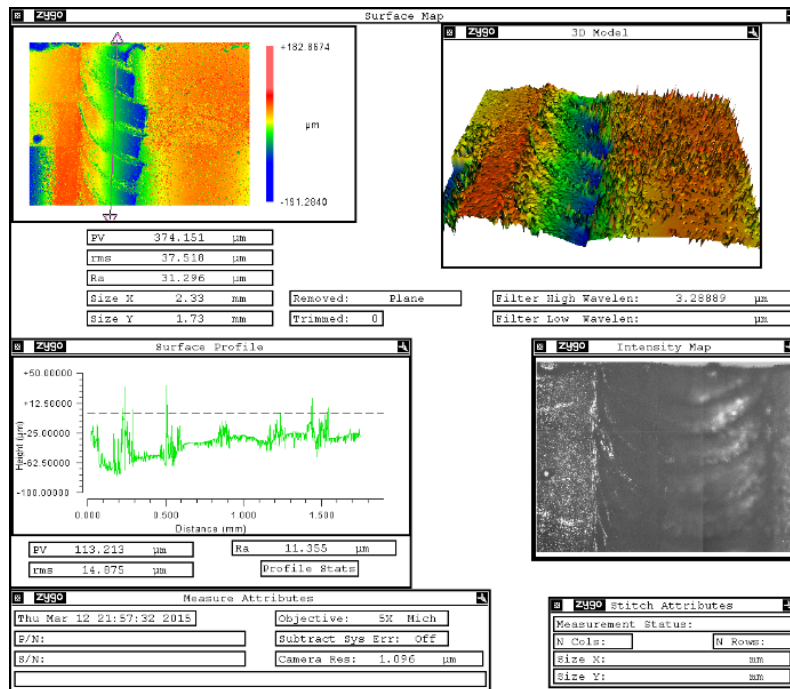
Two – dimensional surface and 3D maps of welded Nimonic 263 sheets
